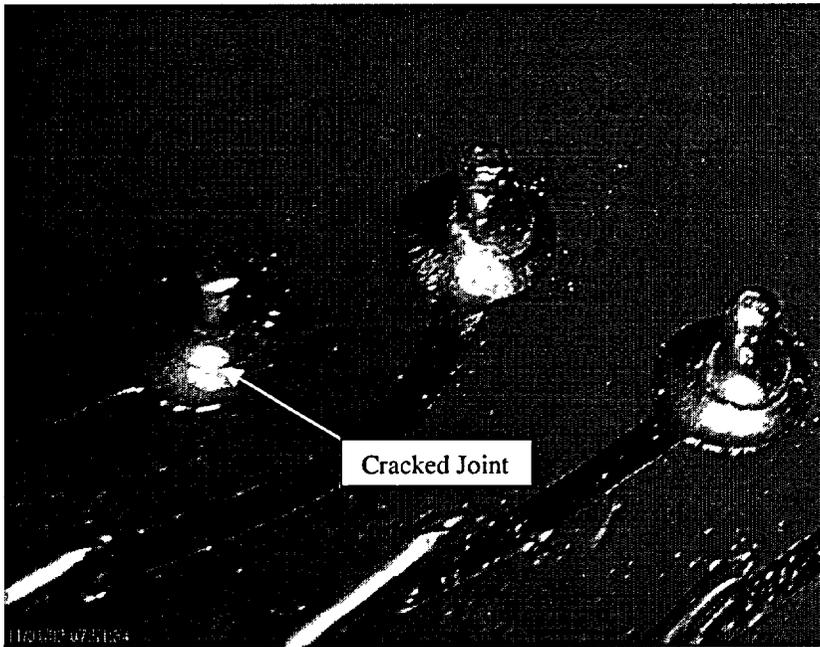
shows cracked solder connections on three tap block pins (underneath tap block).
